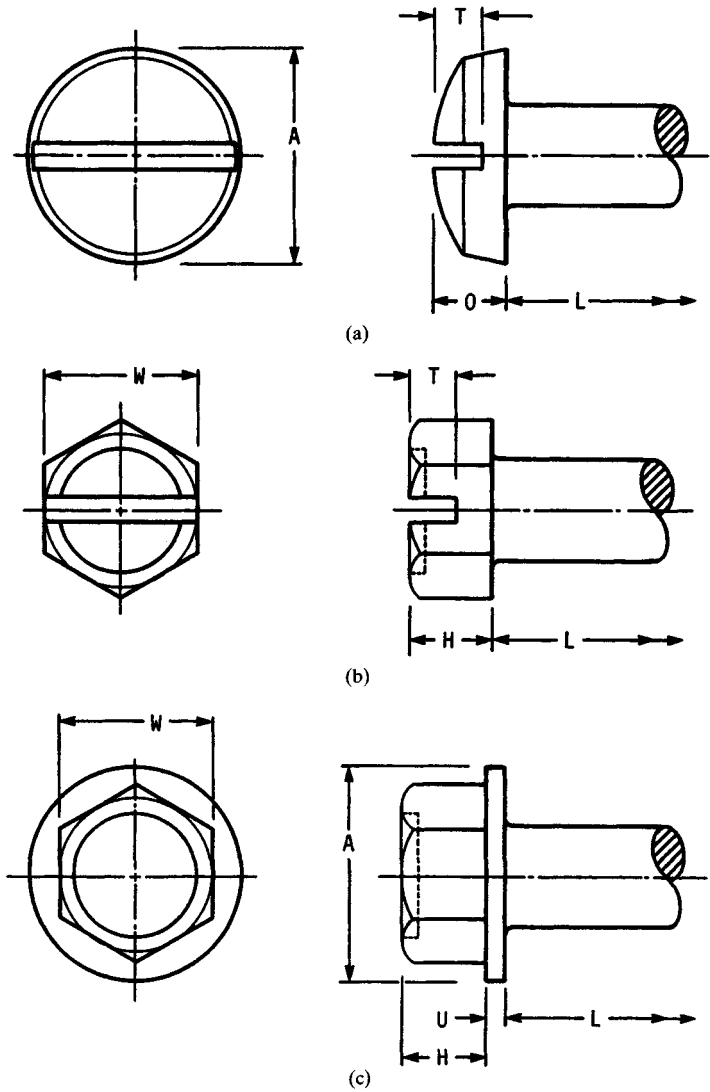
(a) Slotted binding-head machine screw; the edge angle is 5 degrees; (b) slotted and indented hex-head machine screw; (c) hex washer-head machine screw. Both hex screws in this figure may be obtained with or without slots and/or indentations.
